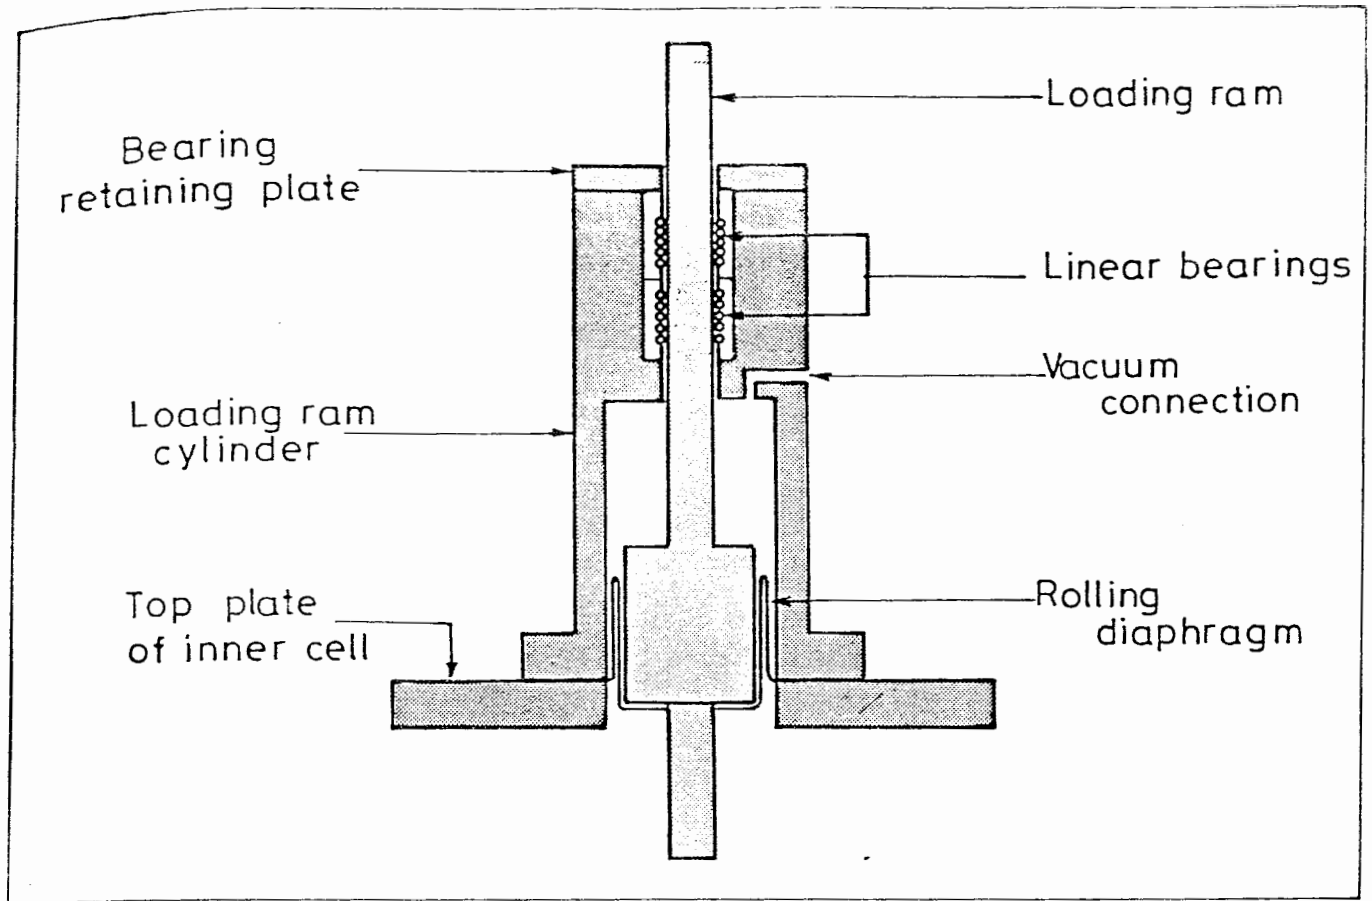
LOADING RAM AND CYLINDER ASSEMBLY.
